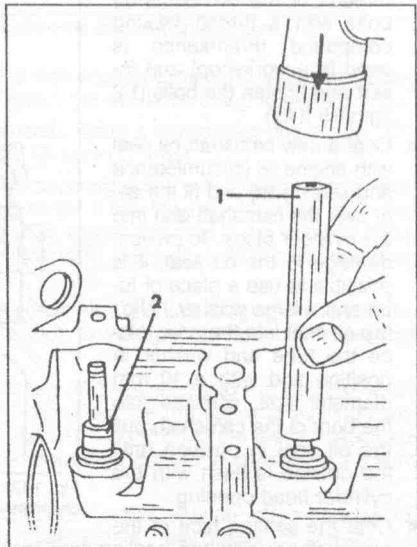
Fitting a valve stem oil seal (2) with a suitable tube (1). — *Danger of damage.
